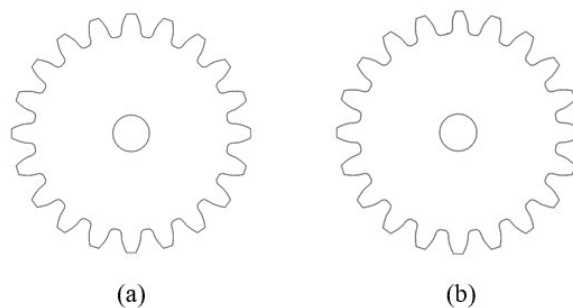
(a) Healthy Gear. (b) Wear Gear.
